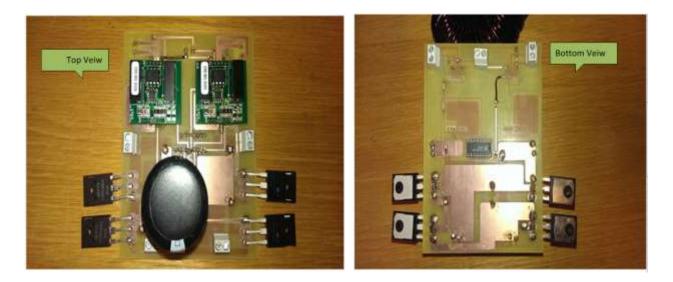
Top and Bottom view of the totem-pole PFC boost converter prototype
